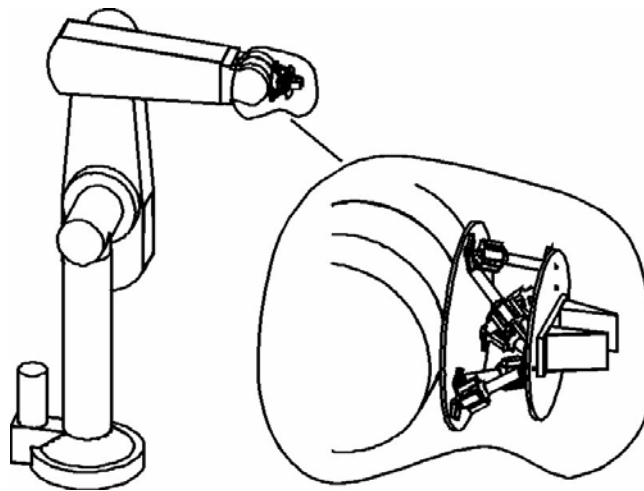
Compliant Platform Inserted between Tool Mounting Plate and End Effector
